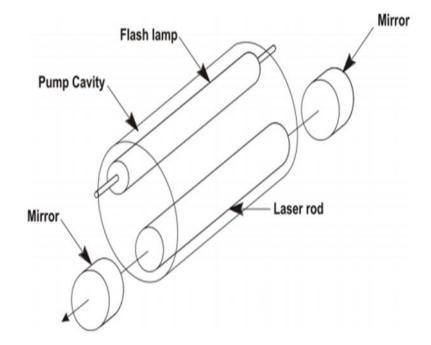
Components of Pulsed laser welding [10]
